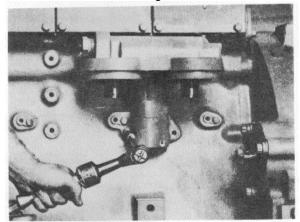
B-17. Remove the Lubricating Oil Filter Mounting Head
